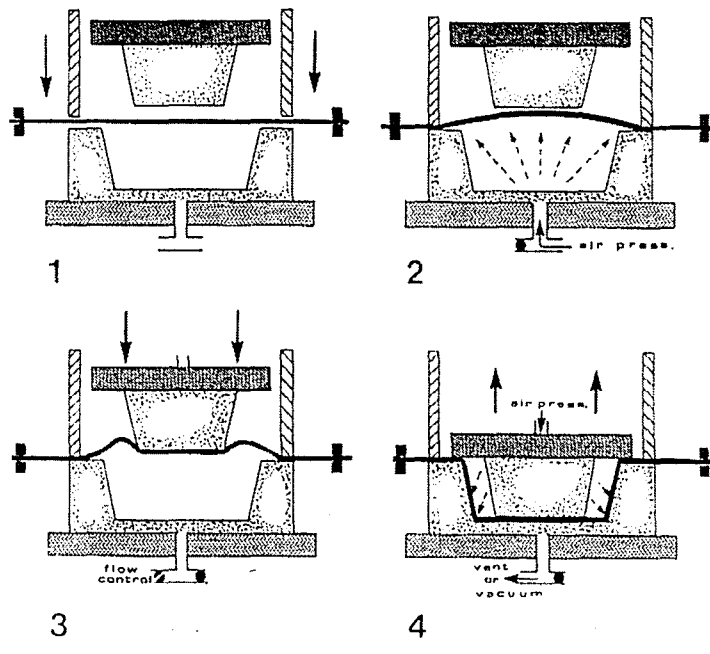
Pressure Bubble Plug-Assist Forming: (1) Preheat Sheet Clamping, (2) Prestretching of Sheet, (3) Mold Closing, (4) Pressure Forming Into Female Mold [2]
